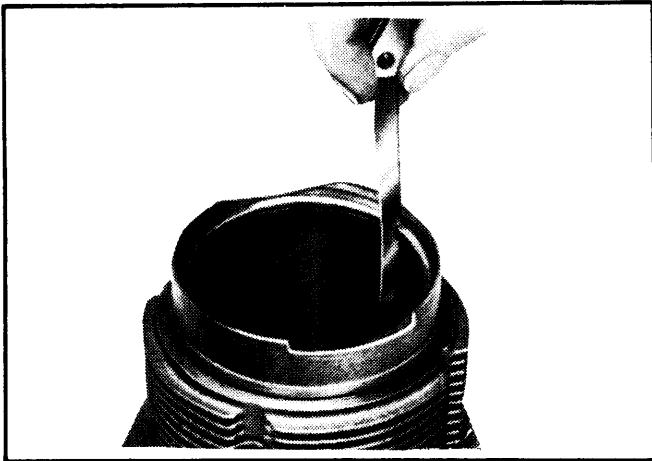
Using a Feeler Gauge to Measure Ring Gap
